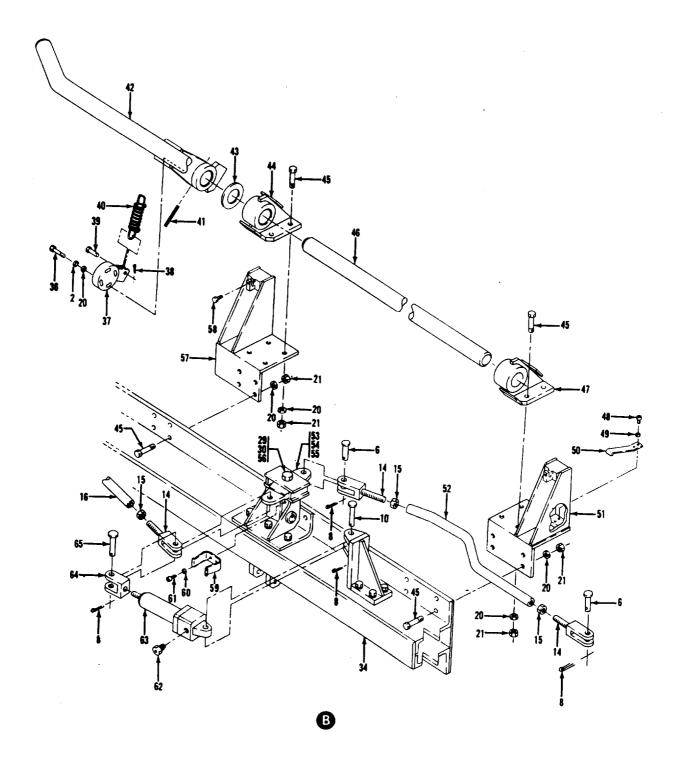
LES Coupler Assembly (Sheet 3 of 9)
